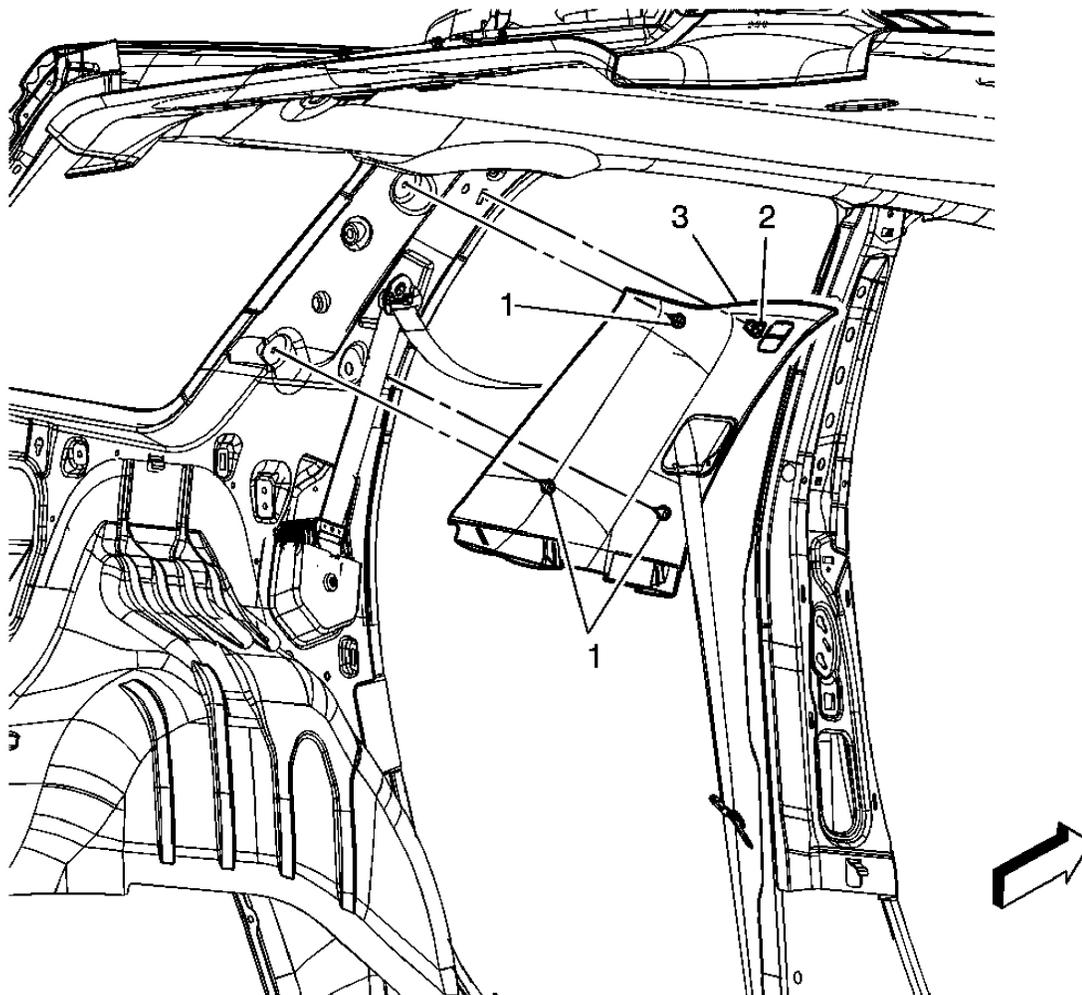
Identifying Body Lock Pillar Upper Trim Panel
